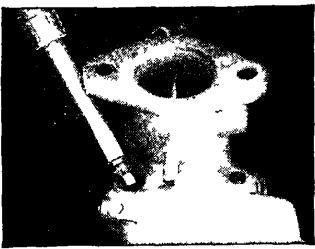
Remove check valve passage plug, strainer, intake and discharge check valves. Remove copper washer from casting
